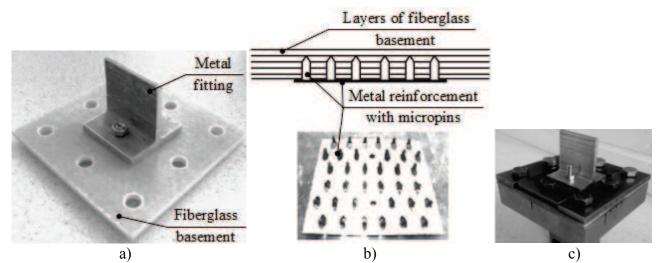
Tested specimens: a) conventional, b) reinforced, c) the test jig assembled with a specimen
